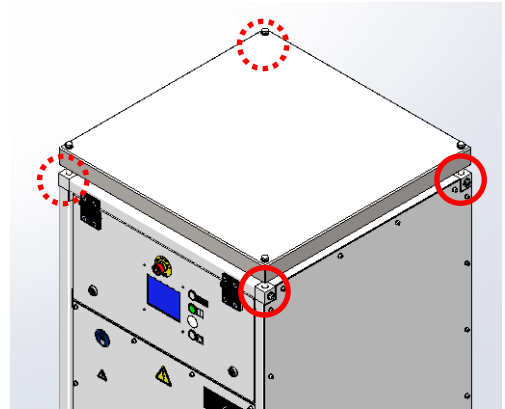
Install Four M10 Eye Bolts and Adequate Slings/Lifting Gear
